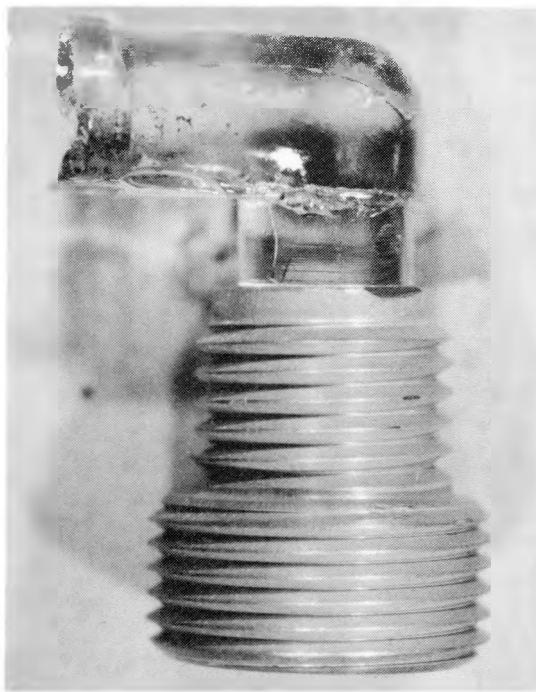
Injection molded-sealed component after removal from the injection mold with glass sprue still attached.
